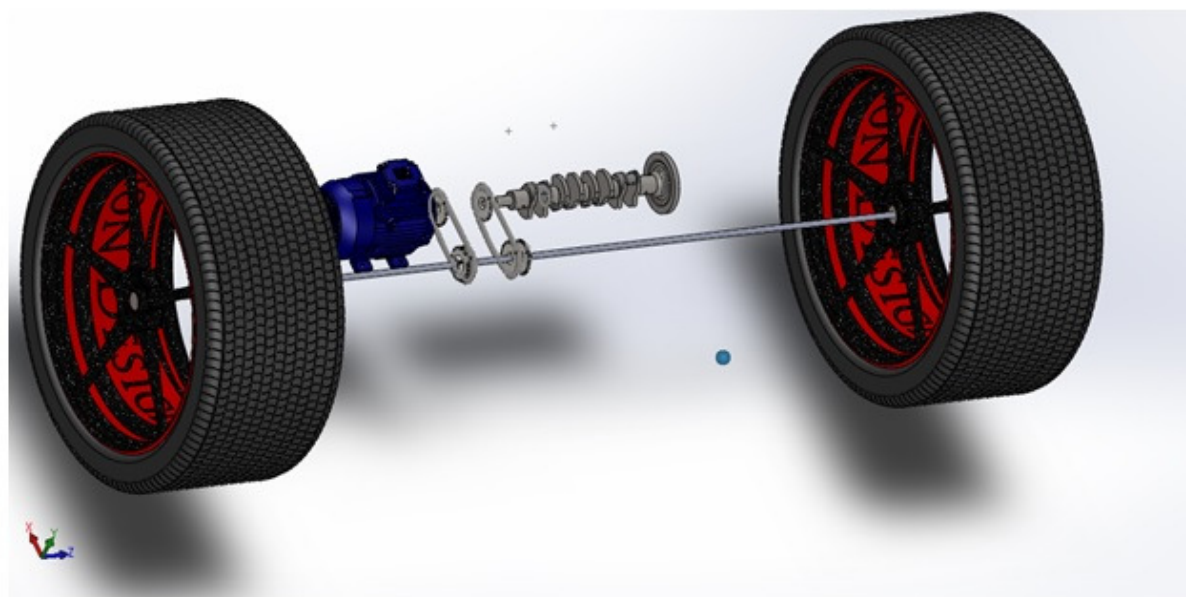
Design of motor and engine wheel drive mechanism (with wheels)
